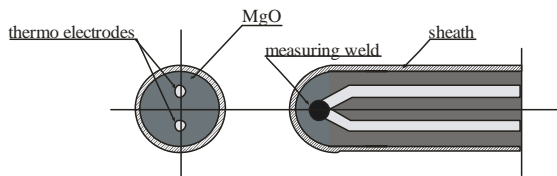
Longitudinal and cross section of the final part of the sheathed thermocouple with the weld insulated from the sheath
